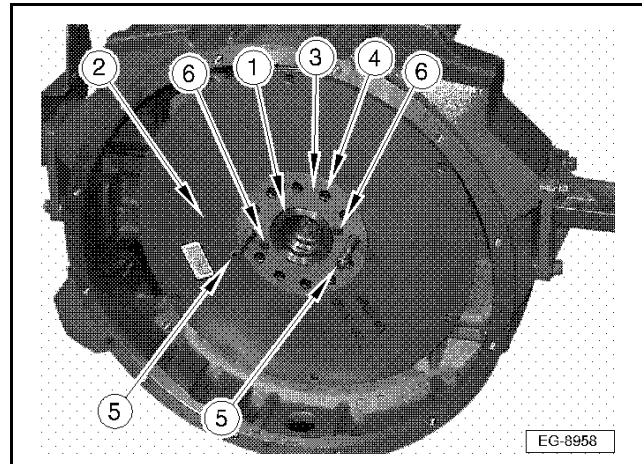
Removing flexplate (MD-3000 and HD-4000 Series Transmissions)
